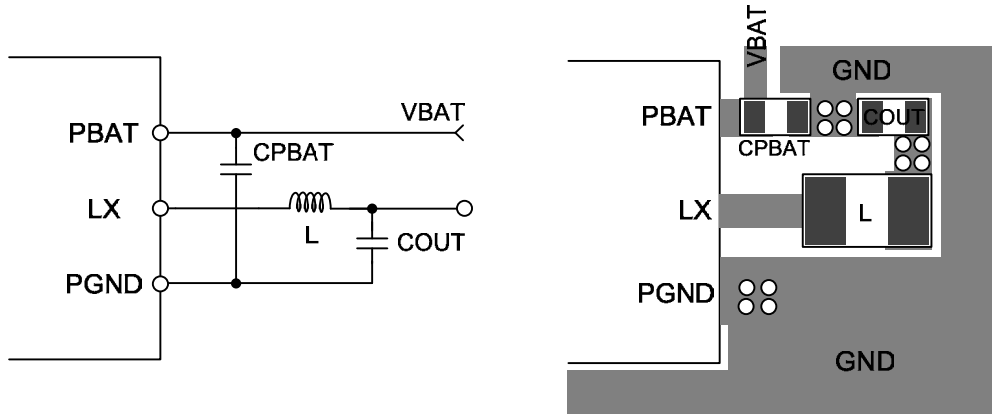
Schematic & PCB Layout Ideal Image (DCDC)
